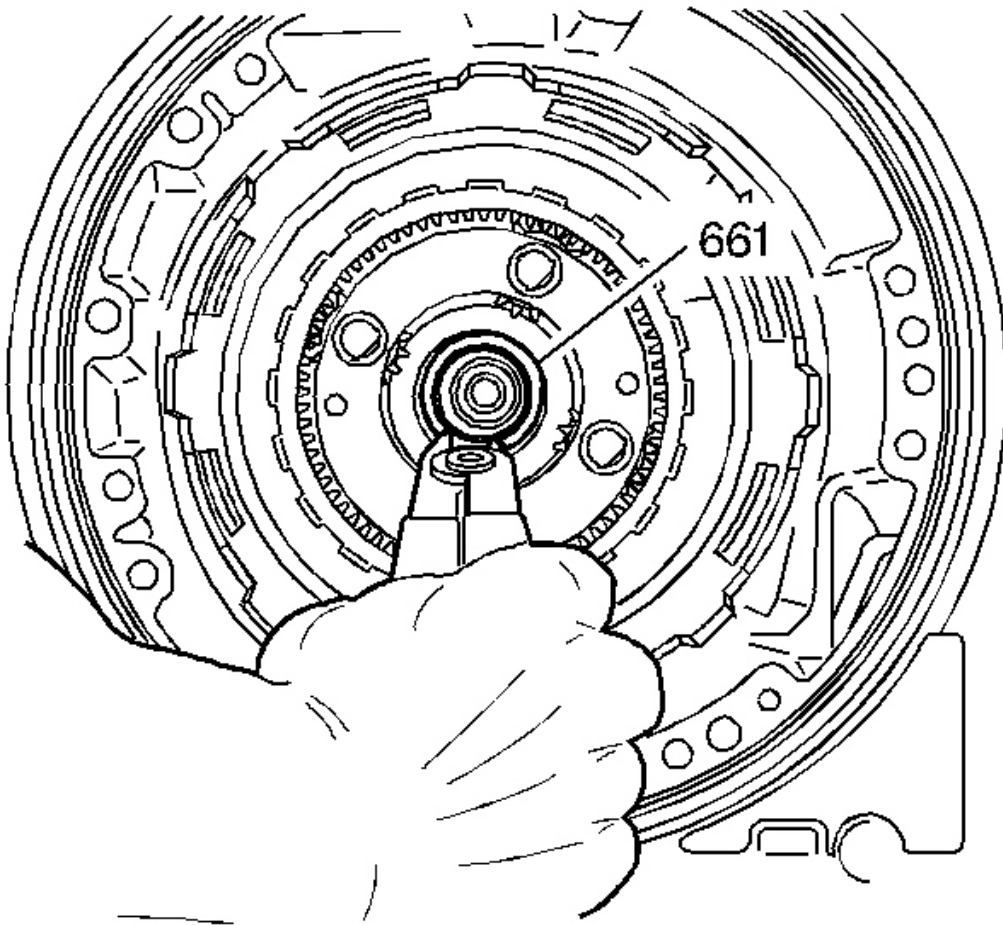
View Of Output Shaft To Input Carrier Retainer
